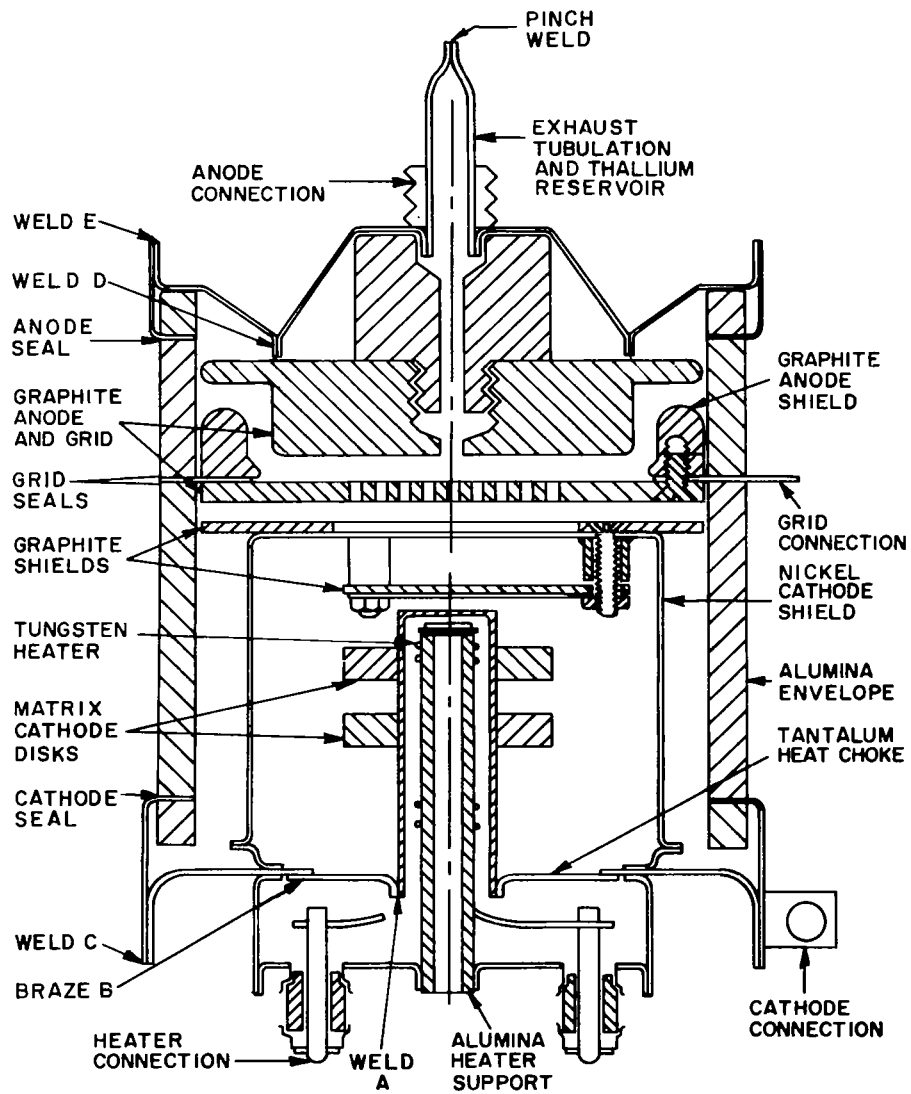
Final Thyratron Design Developed for Endurance Testing
